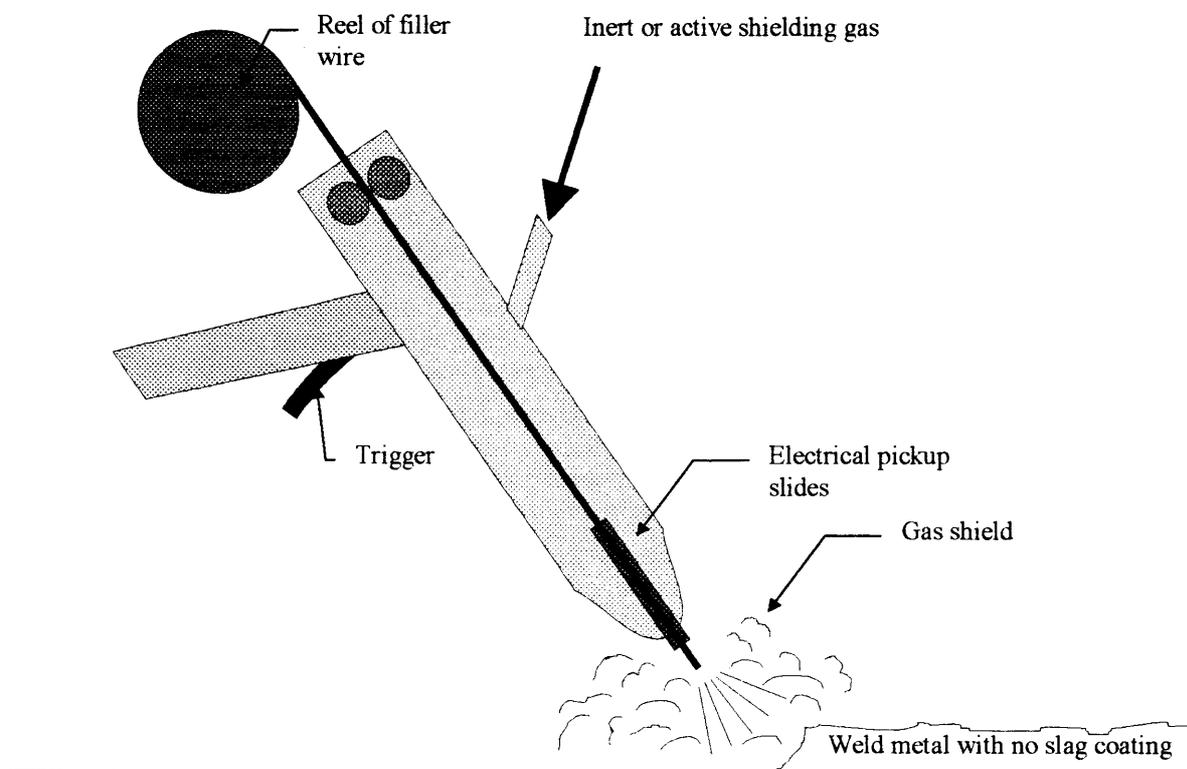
Metal Inert Gas (MIG) Welding
